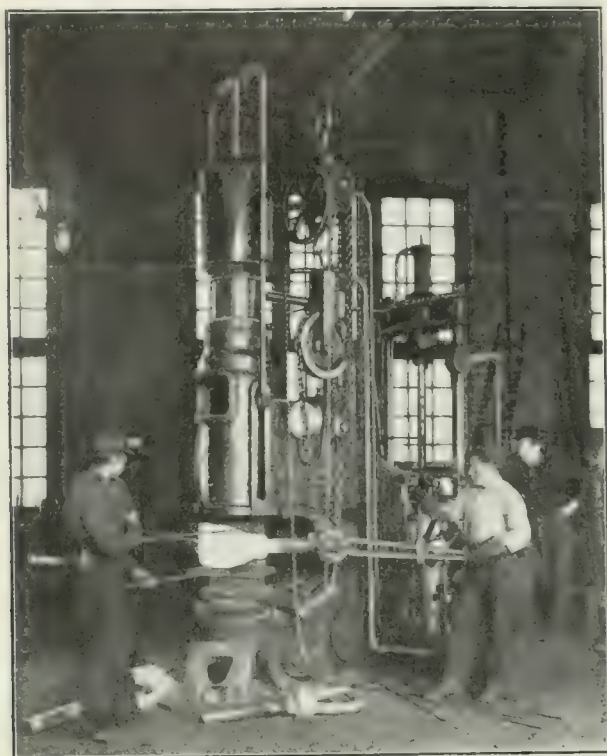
The 150-Ton High Speed Hydraulic Forging Press Made by the United Engineering & Foundry Company, Pittsburgh, Pa.
